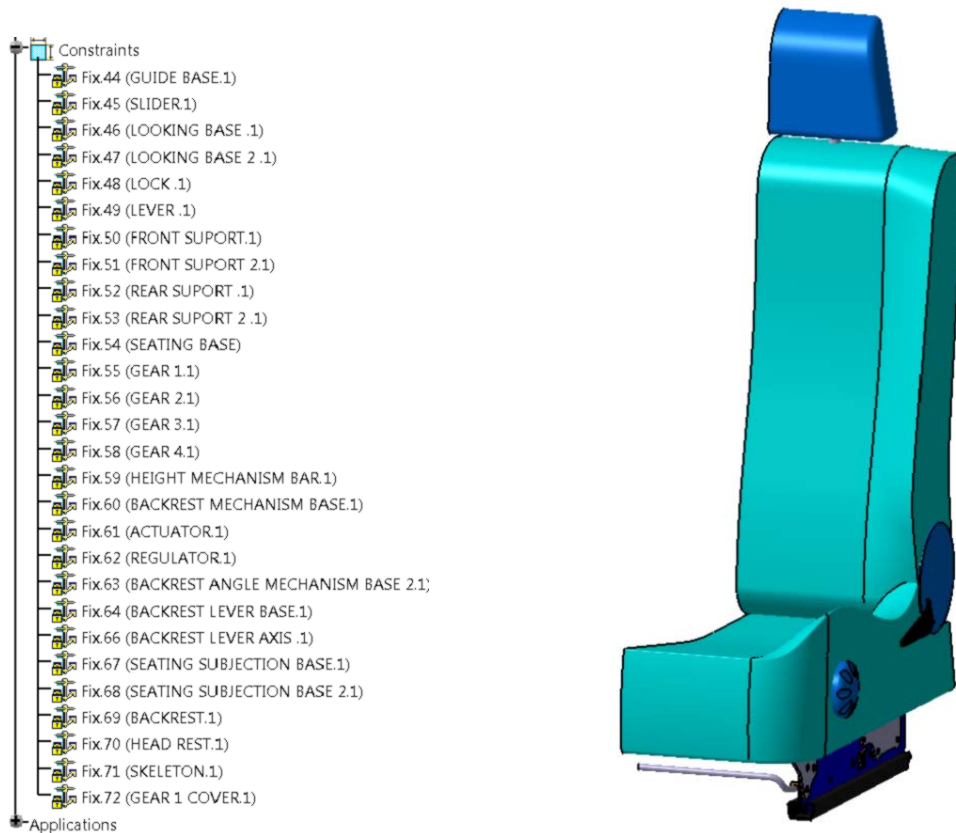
Final assembly of the components of the Longitudinal Translation Mechanism and the Height Regulator Mechanism.
